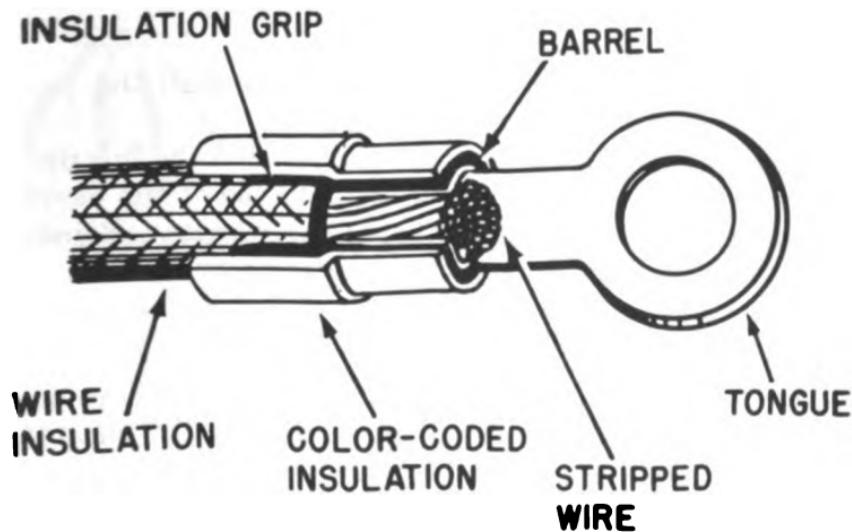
Preinsulated terminal lug: cutaway drawing.
